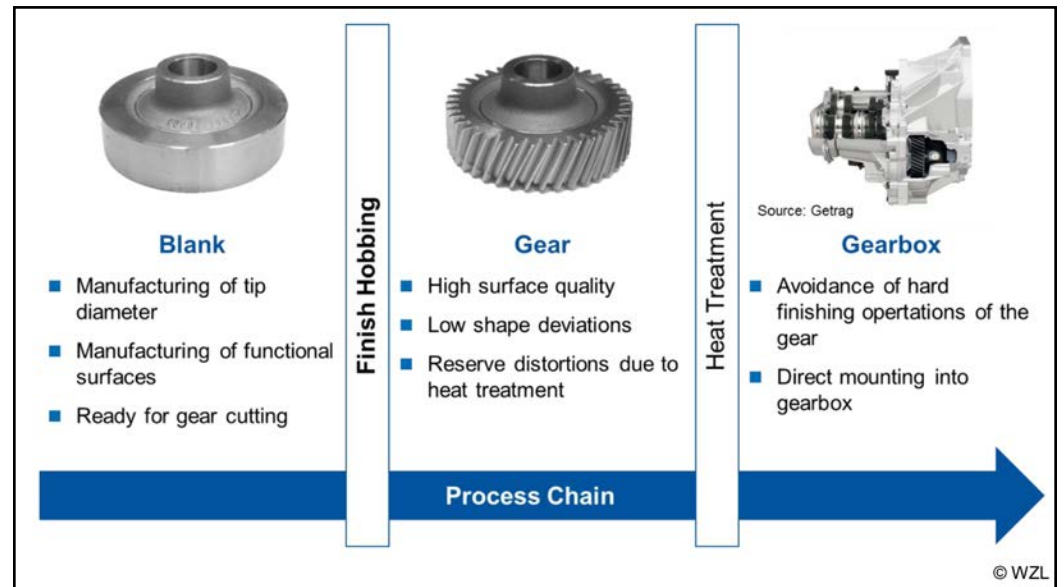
Process chain of gear finish hobbing (Ref. 9).
